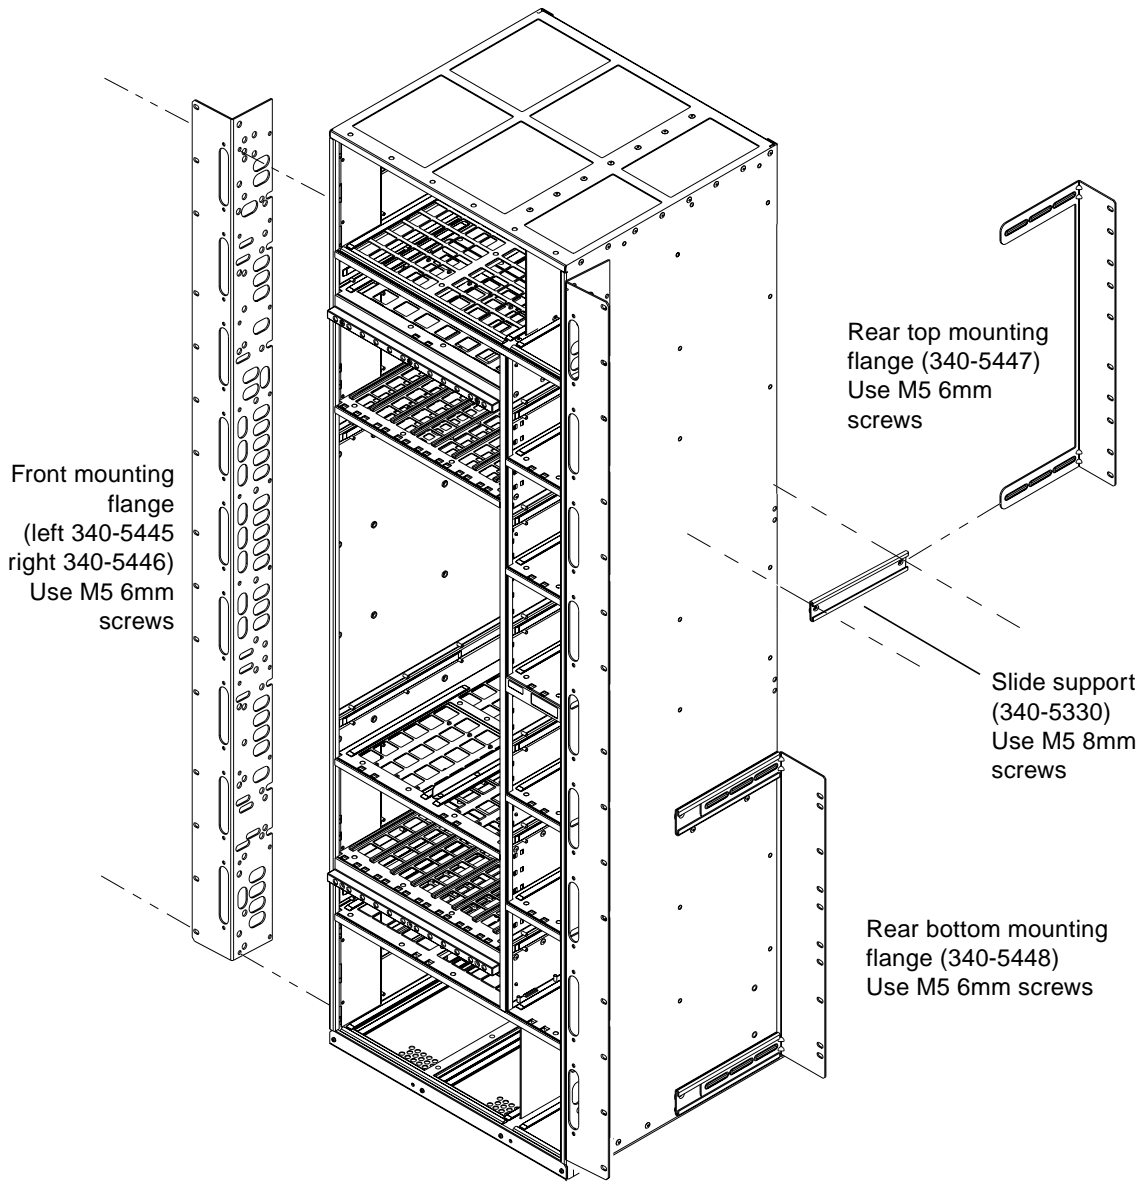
24-inch Rack Mounting Flange Kit
